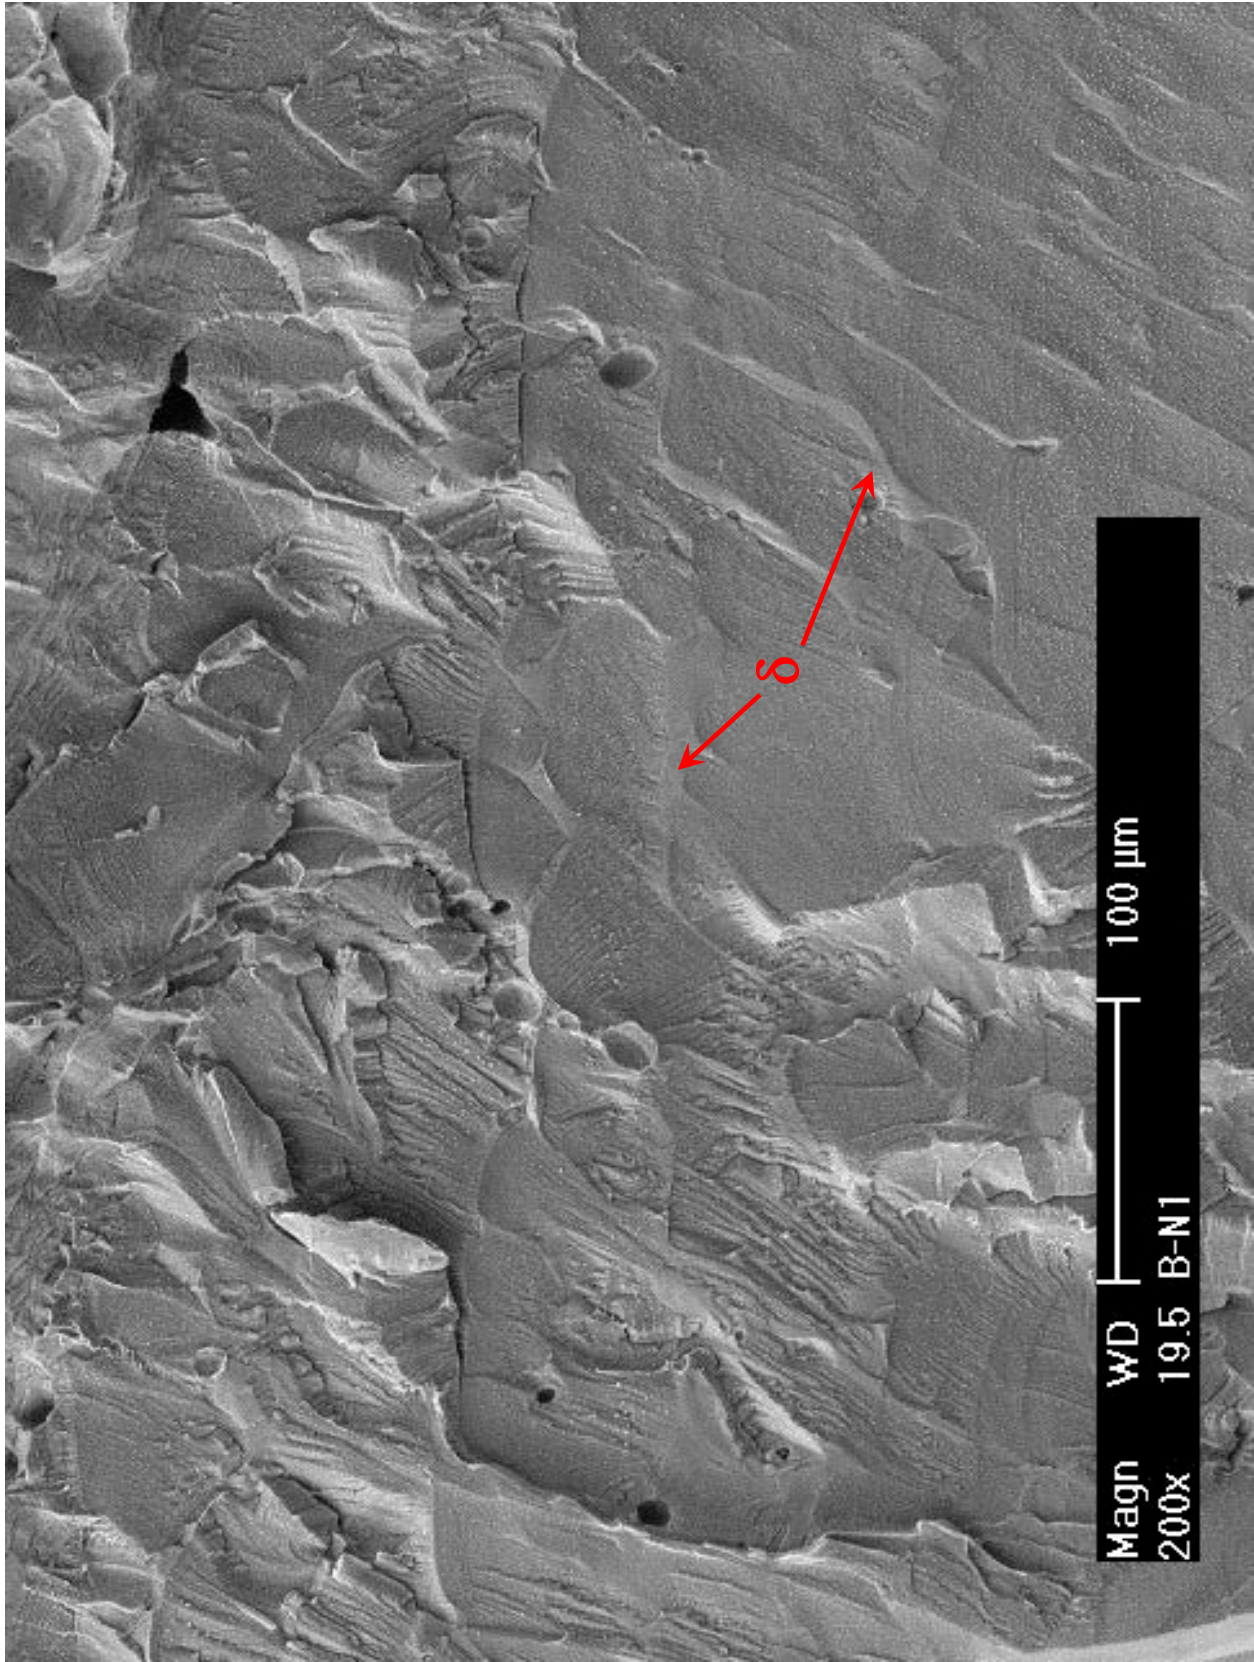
Transgranular fracture in specimen B-N1 at the end of the precracking. Crack propagation from bottom to top.
